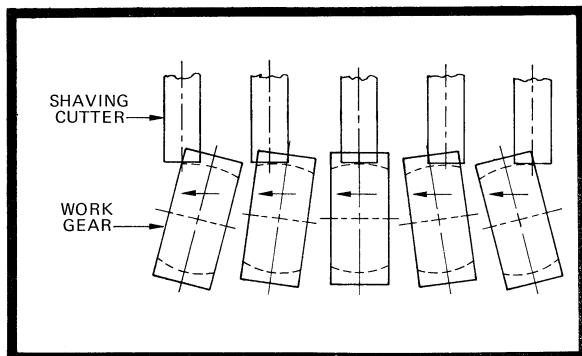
Rocking table action with conventional shaving shows zone of cutting through center of cutter.
